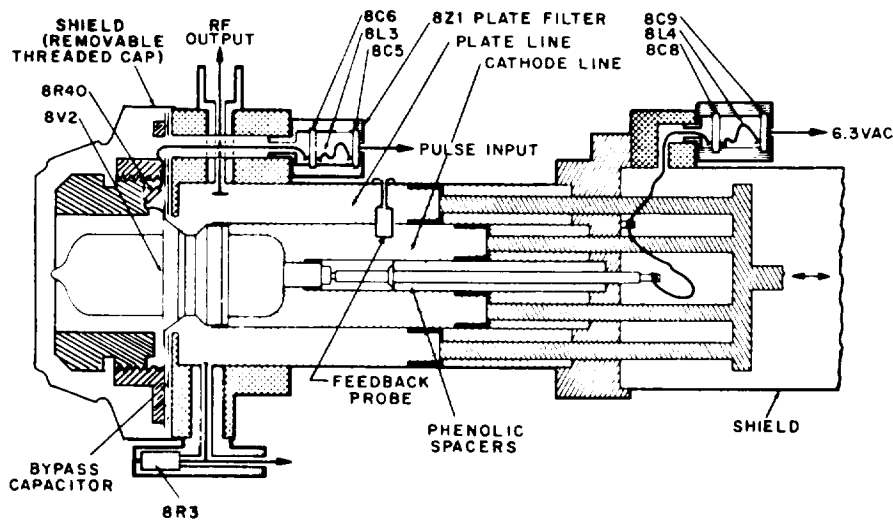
RF Oscillator Assembly 8A1, Cutaway Drawing
